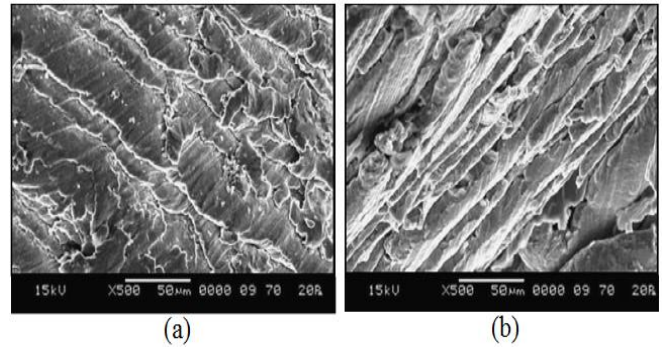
SEM image of the weld bottom of tensile tested workpieces; (a) as-welded; (b) PWHT
